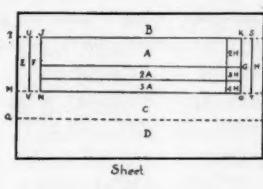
Single-Piece Paper Wrapping for Large Chocolate Cream Bar. (Actual Size)
